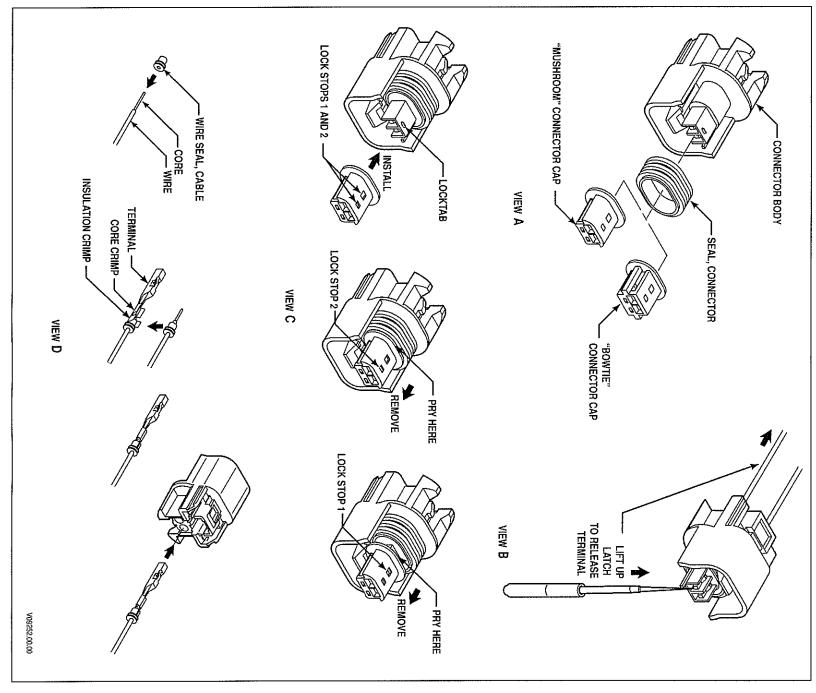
B. Delphi-Packard GT150 Series Connectors—Push-to-Seat (Speed Sensor; Accumulator Solenoid; Retarder Solenoid)
